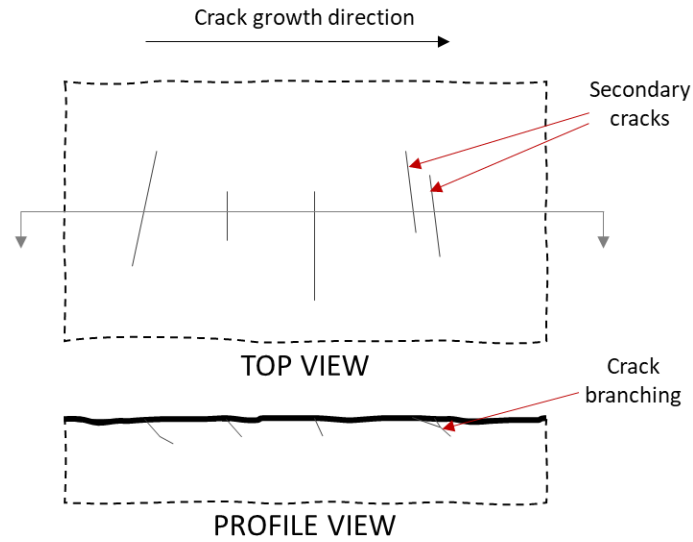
Illustration on the connection between secondary crack and crack branching. Top view represents the fractured surface, while profile view represents the fracture profile
